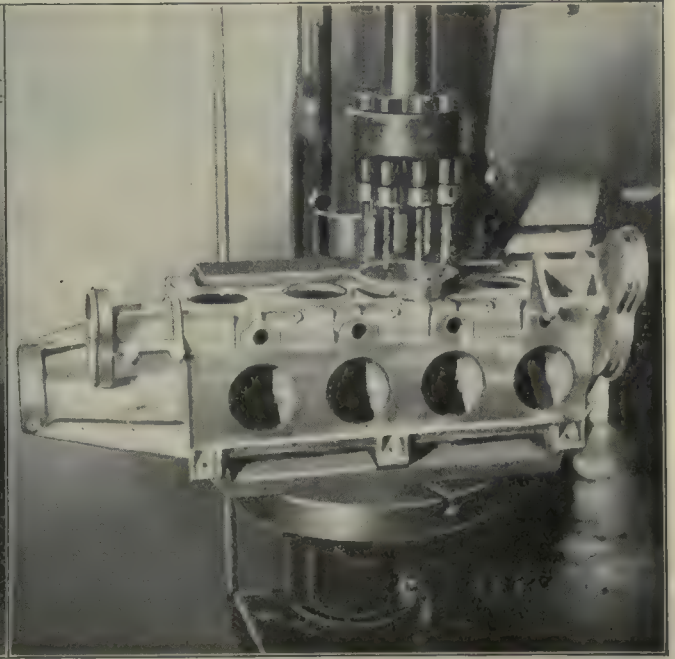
DRILLING ENGINE BASE FOR CYLINDERS
